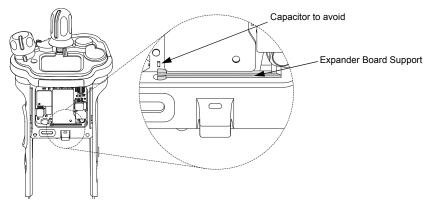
Pull Expander Board Support (Opt. Expansion Board)
